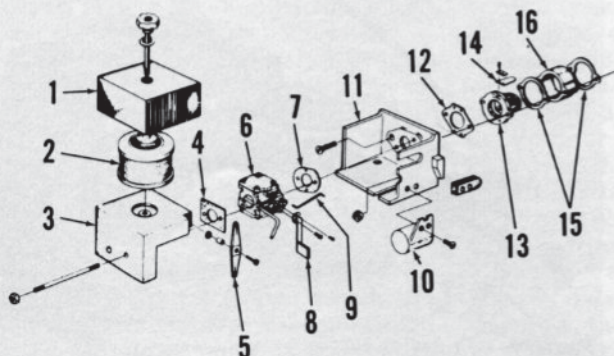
Exploded view of induction system. Components (8, 10 and 11) are not used on models with 251 engine.
